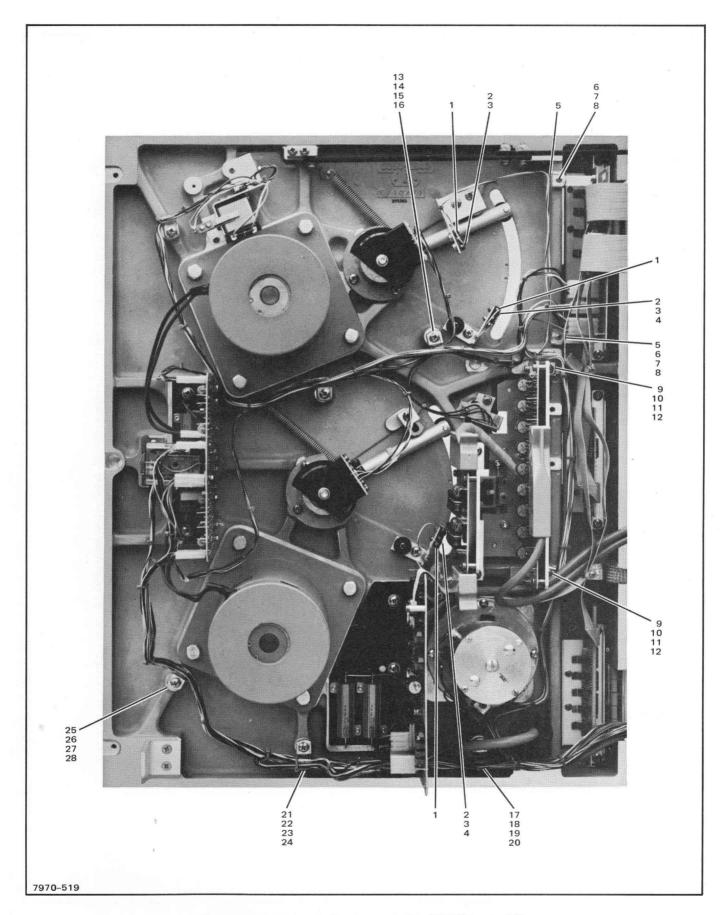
Transport Harness Assembly W2 (Sheet 1 of 2)
